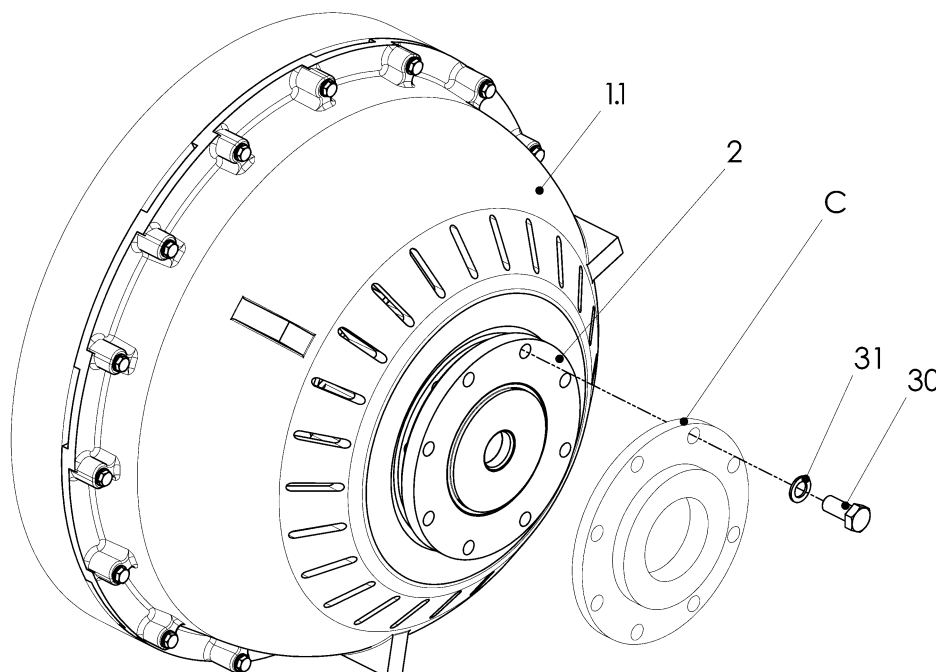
Mounting the driven unit to the flange bearing housing
